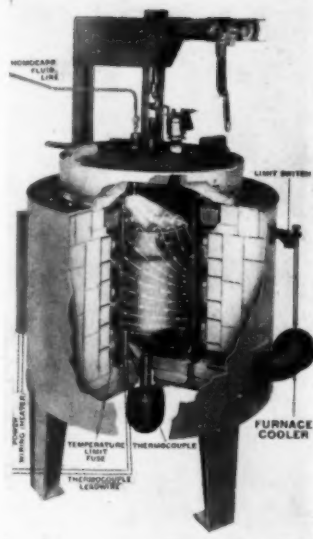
The Homocarb equipment of The Integra Co., Ltd.
